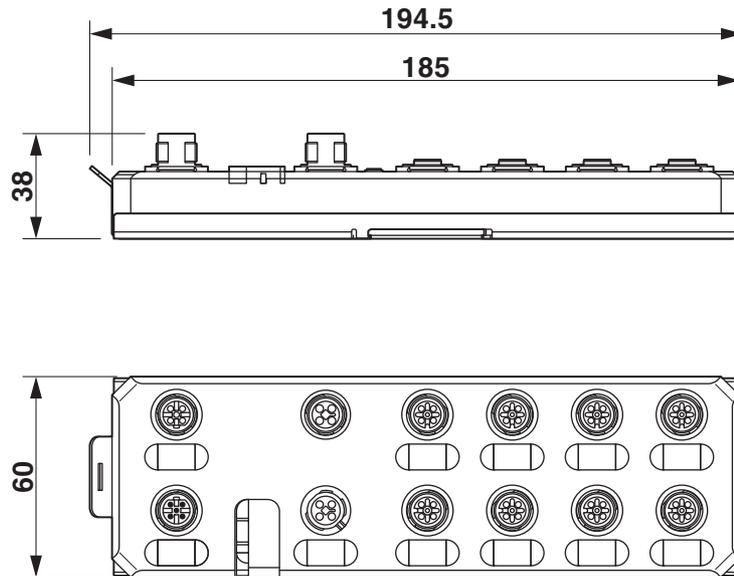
Housing dimensions (mm) of PROFIBUS metal devices with mounting plate
